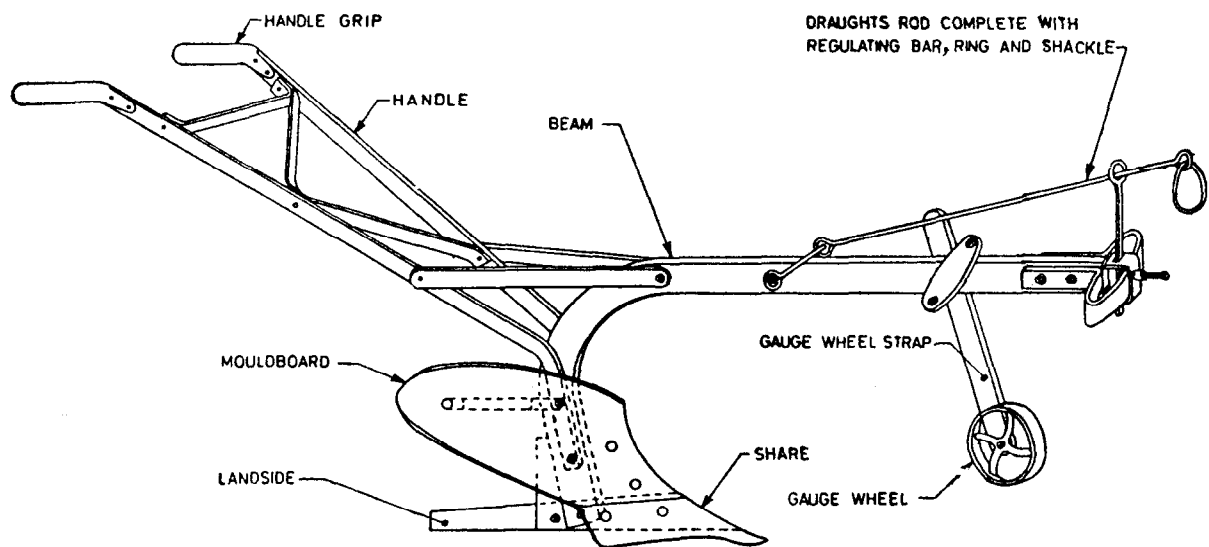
NOMENCLATURE OF MAIN PARTS OF MOULDBOARD PLOUGH, FIXED TYPE ( SHORT BEAM )
